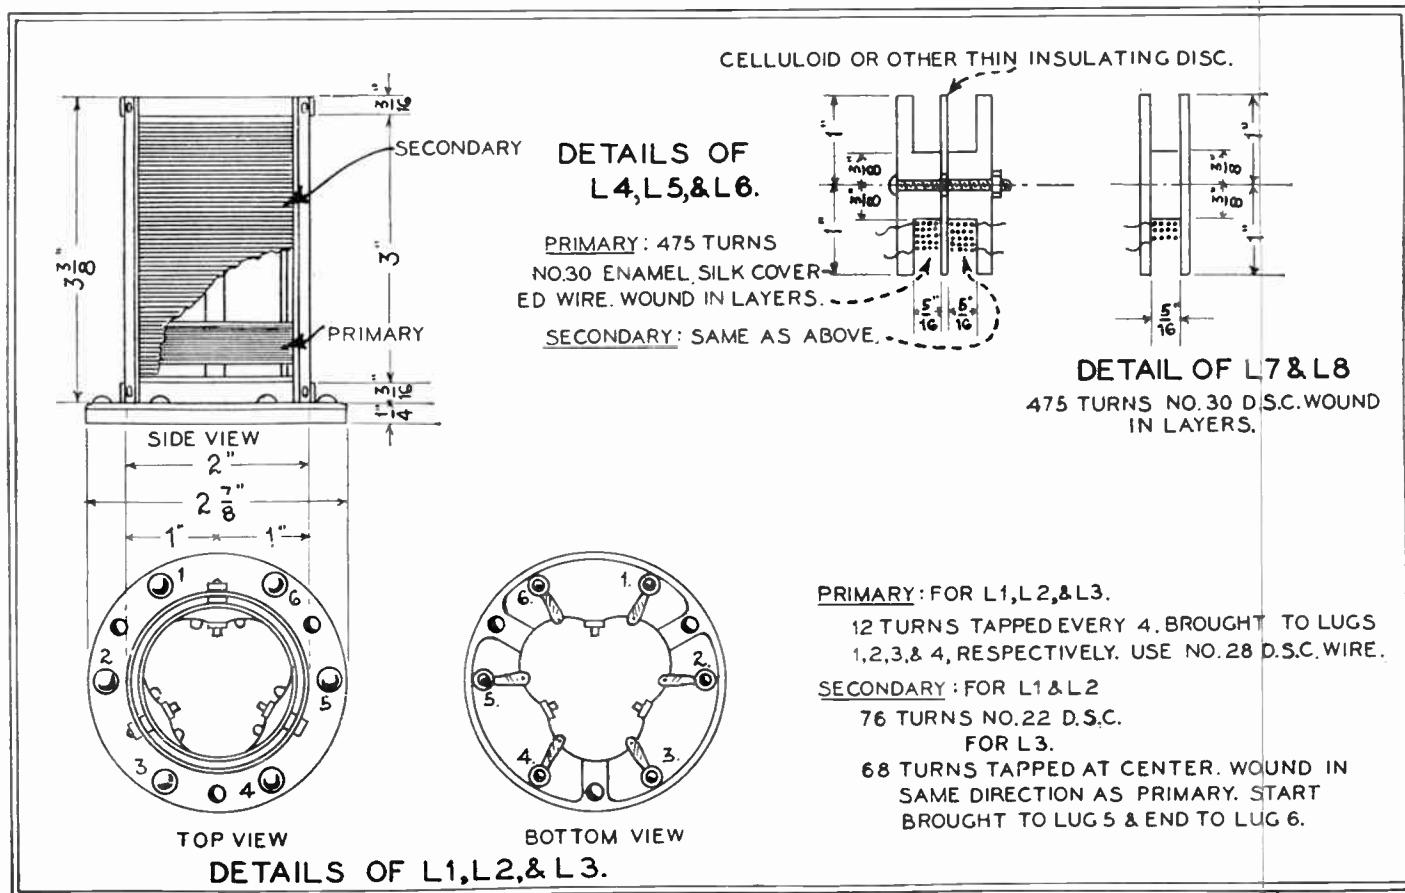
These drawings give complete details of winding the various coils of the receiver. Coils L1, L2 and L3 are of air-core construction and the others are wound on wooden bobbins. If best results are desired, the coils must be wound accurately and the intermediate-frequency transformers must be carefully matched.
